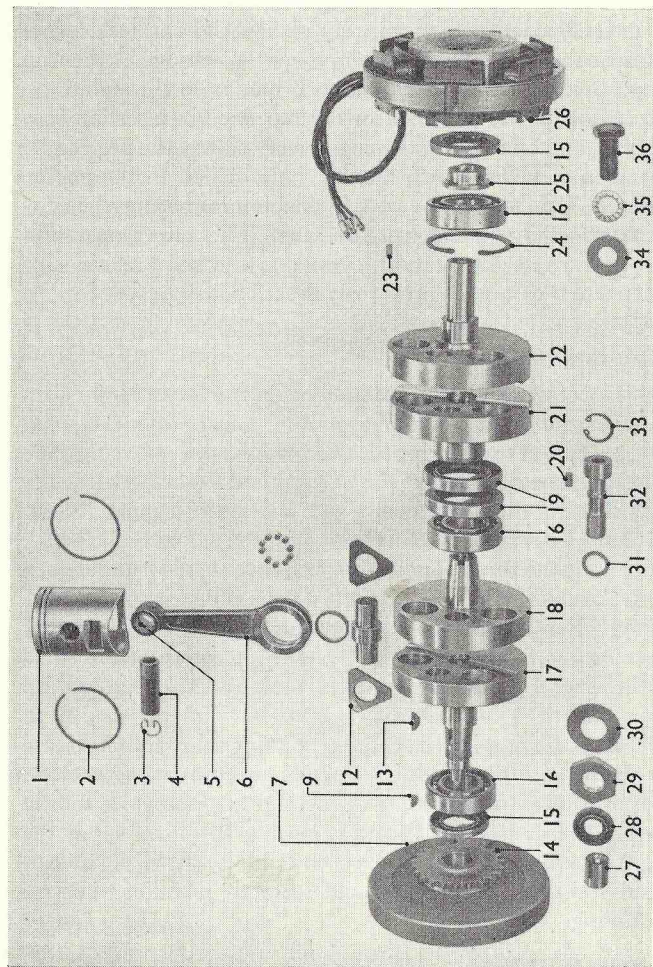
PISTON, CONNECTING-ROD AND CRANKSHAFT ASSEMBLY—LEADER AND ARROW.
